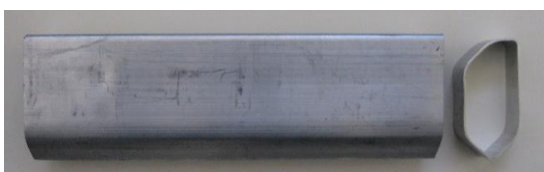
The test result for tube filled with water at pressure equal to 8 bars using the three-piece die
